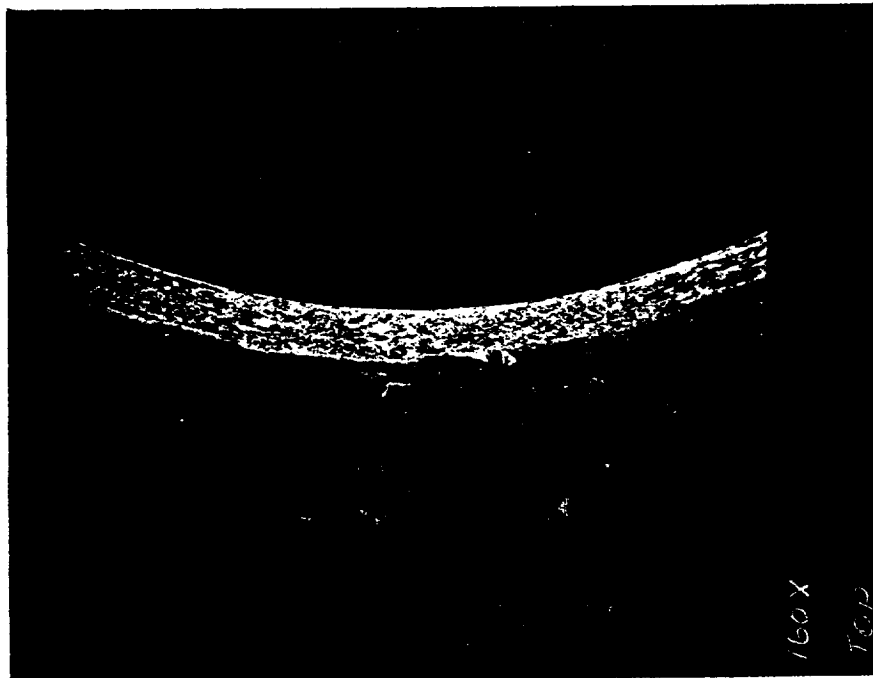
Magnified View of Armature Side of Bearing Journal of Defective Pivot Bearing (160X)
